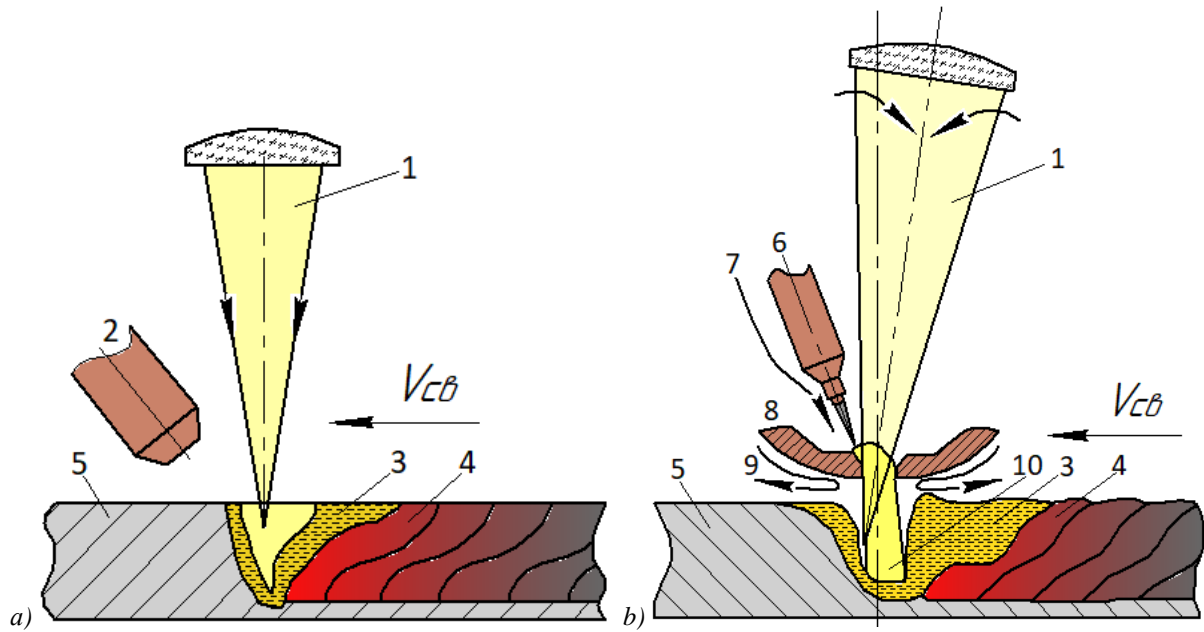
Scheme of laser (a) and hybrid laser-plasma (b) welding: 1 – focused laser radiation; 2 – protective nozzle; 3 – welding pool; 4 – weld metal; 5 – base metal; 6 – non-consumable electrode; 7 – plasma gas; 8 – plasma nozzle; 9 – shielding gas; 10 – plasma of direct action.
